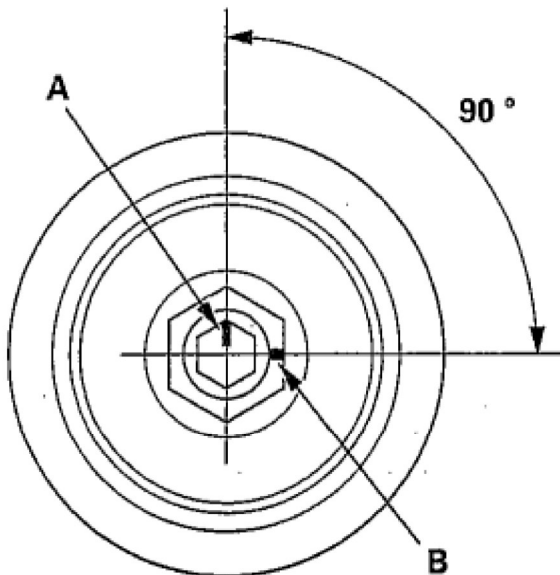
Marking The Bolt Head And The Crankshaft Pulley
